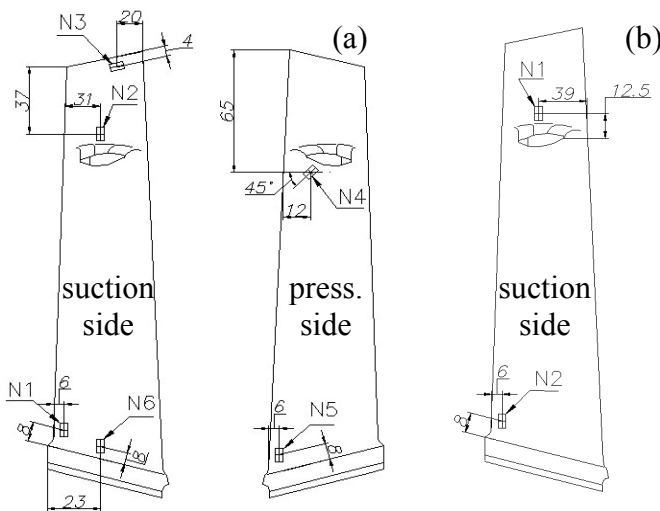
Strain gauge locations on tested blades: (a) wheel 1; (b) wheel 2.
